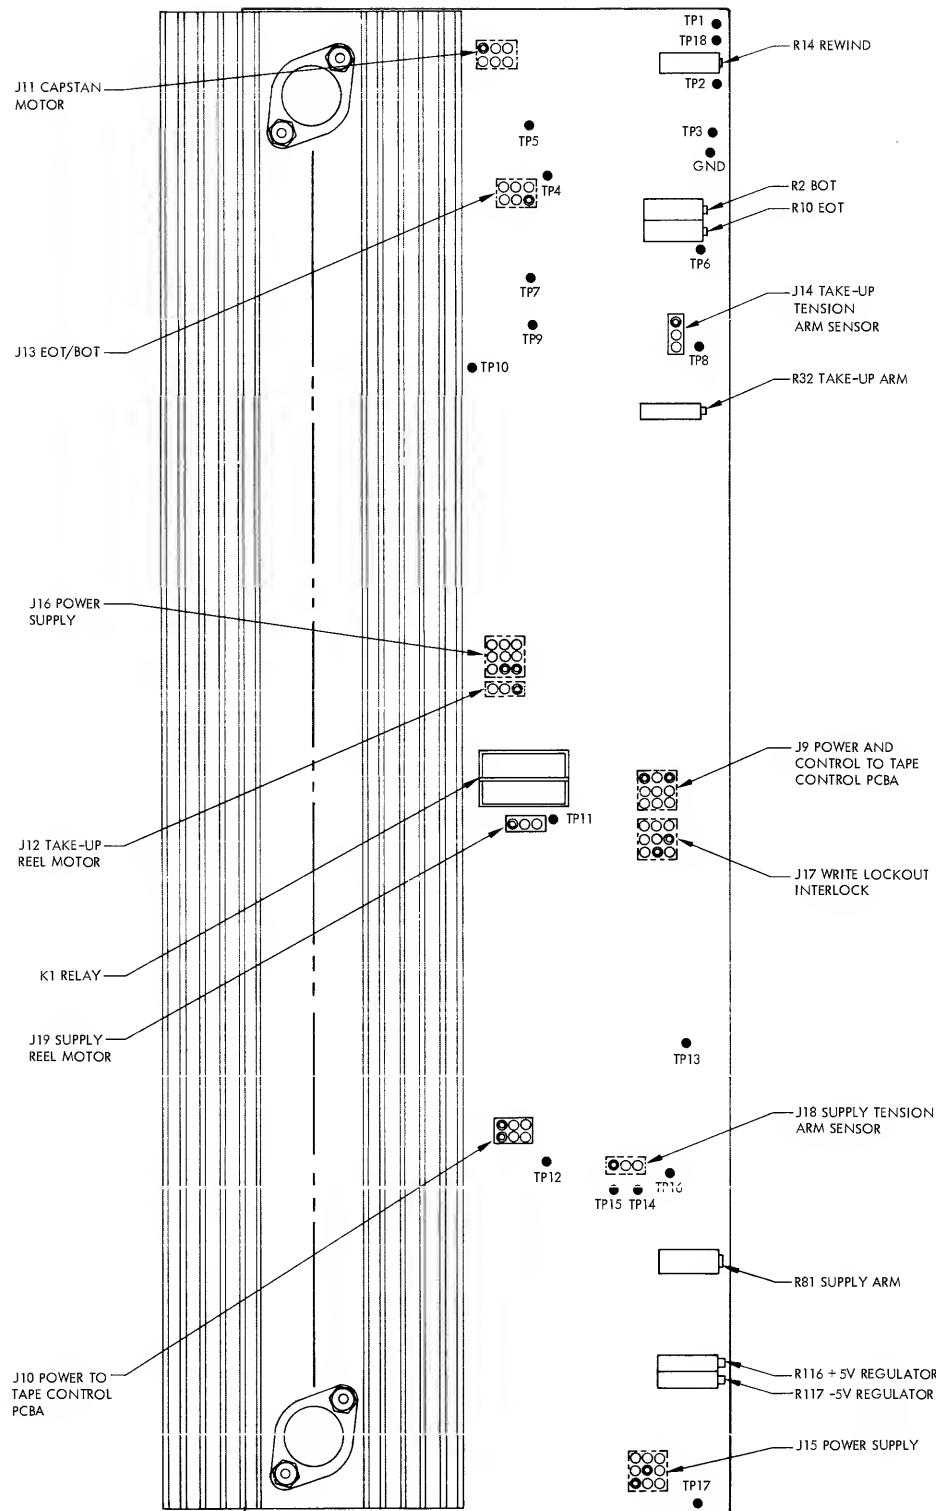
Servo and Power Supply B PCBA, Test Point and Connector Placement
